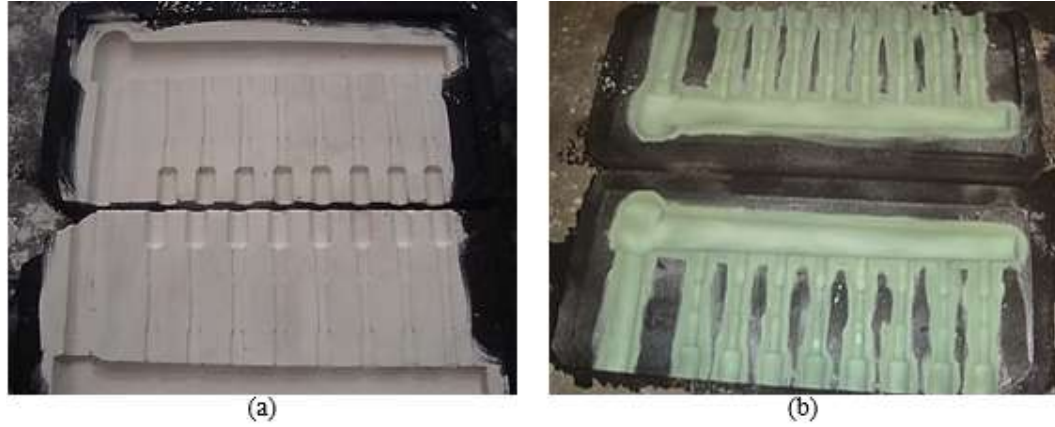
Steel specimens before cleaning and finishing (a) Tensile and (b) Fatigue
